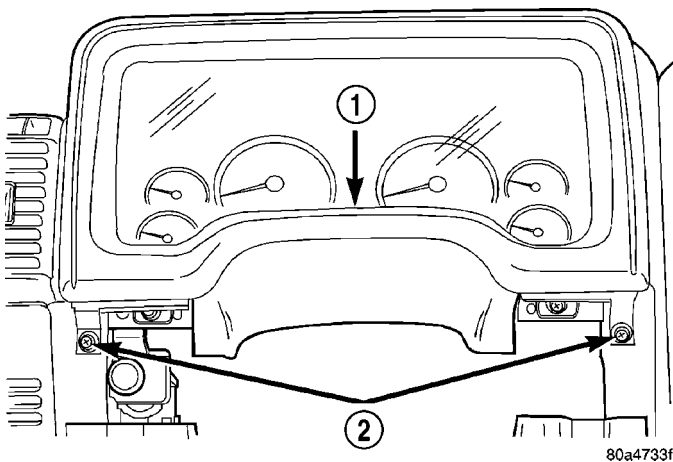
CLUSTER BEZEL LOWER SCREWS REMOVE/INSTALL
